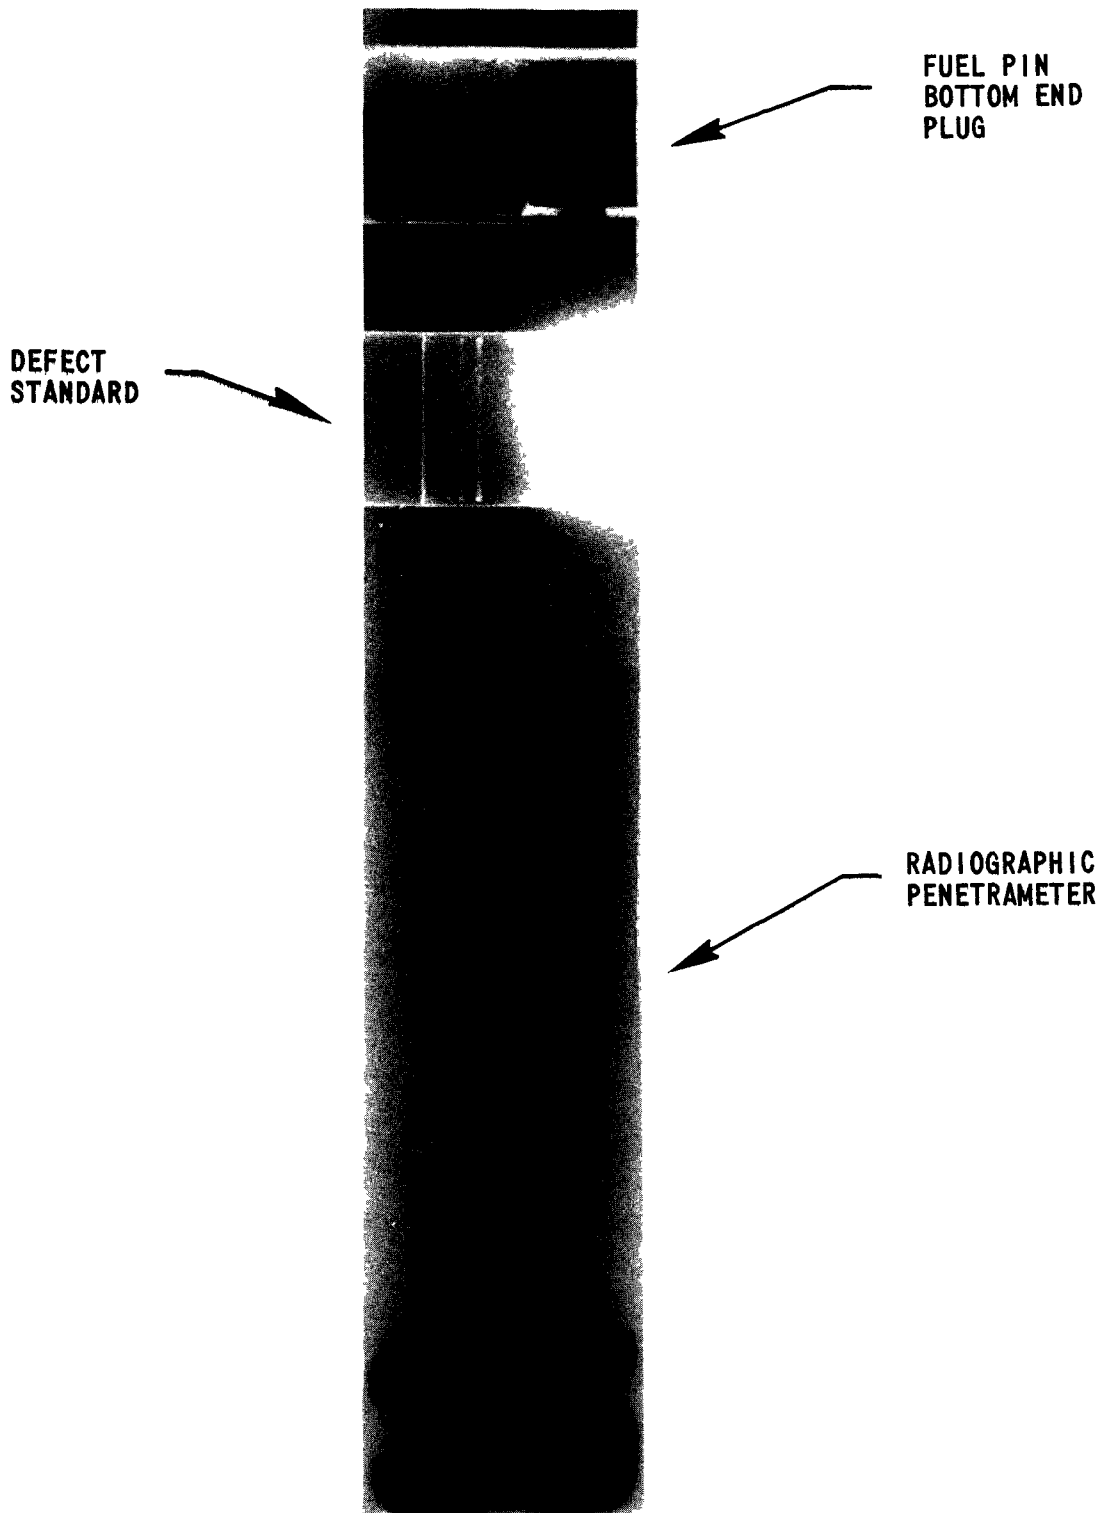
Positive of a Weld Radiograph Illustrating an Acceptable Bottom End Closure Weld. Note the Small Fuel Chip Between Bottom Insulator and Clad ID; Mag 3X
